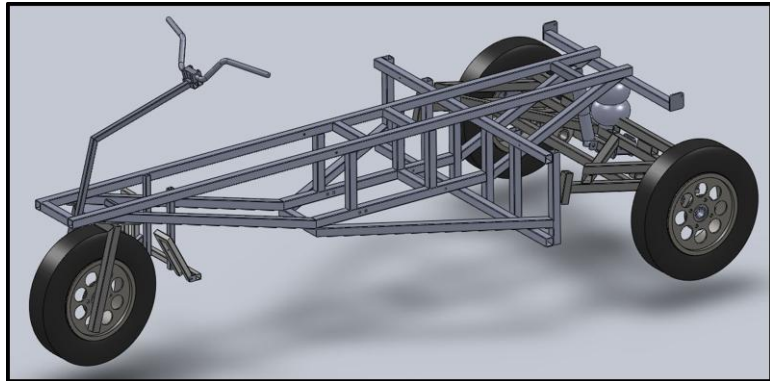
Truss Frame and Rear Trailing Arm Design
